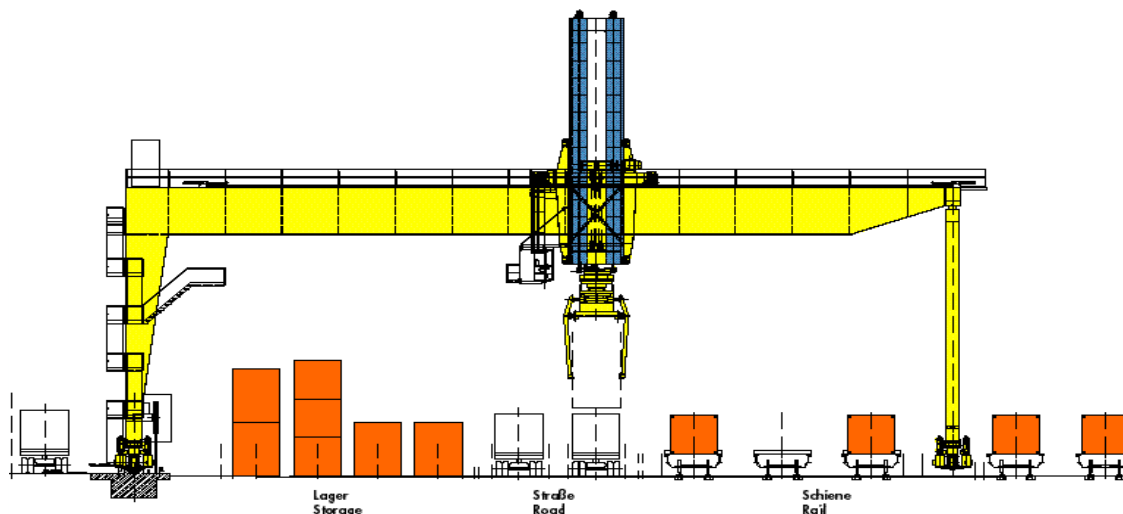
/1: Cross Section of Single Area Krupp Fast Handling System
